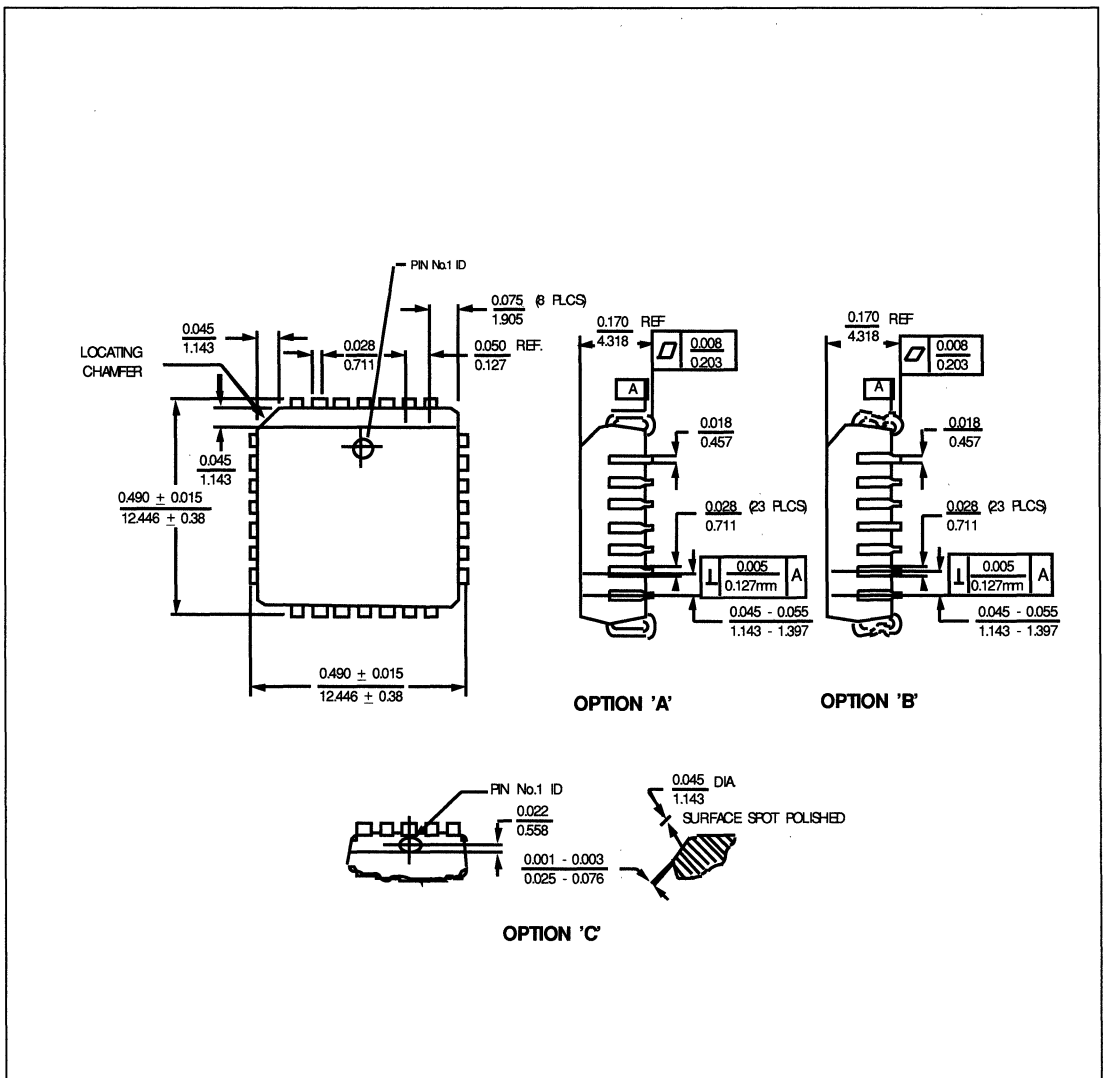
28-PIN PLCC PACKAGE DRAWING
